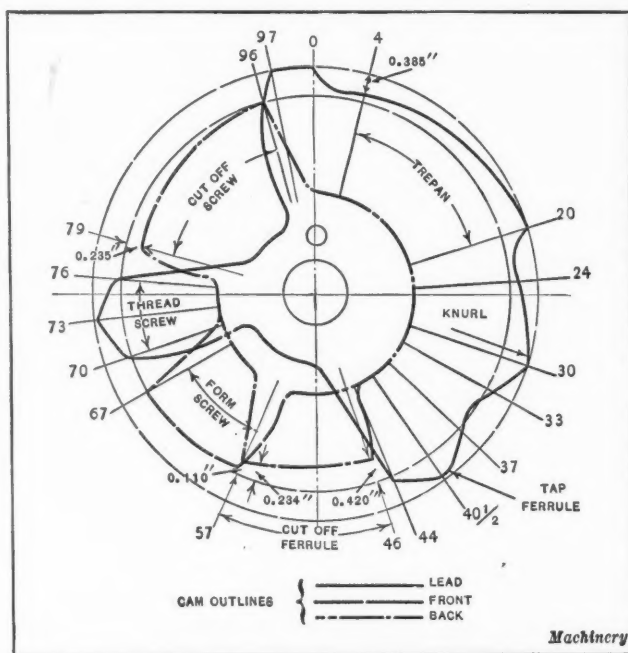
Diagrammatic Lay-out of Cams used in the Production of the Pieces shown in Fig. 1
